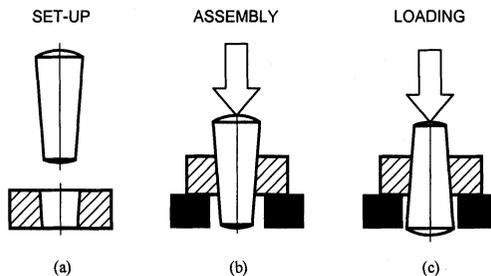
Geometry of specimens with assembly and loading arrangements.
